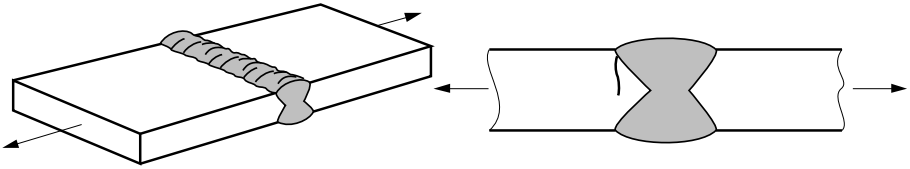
Fatigue cracking of a transverse butt weld
